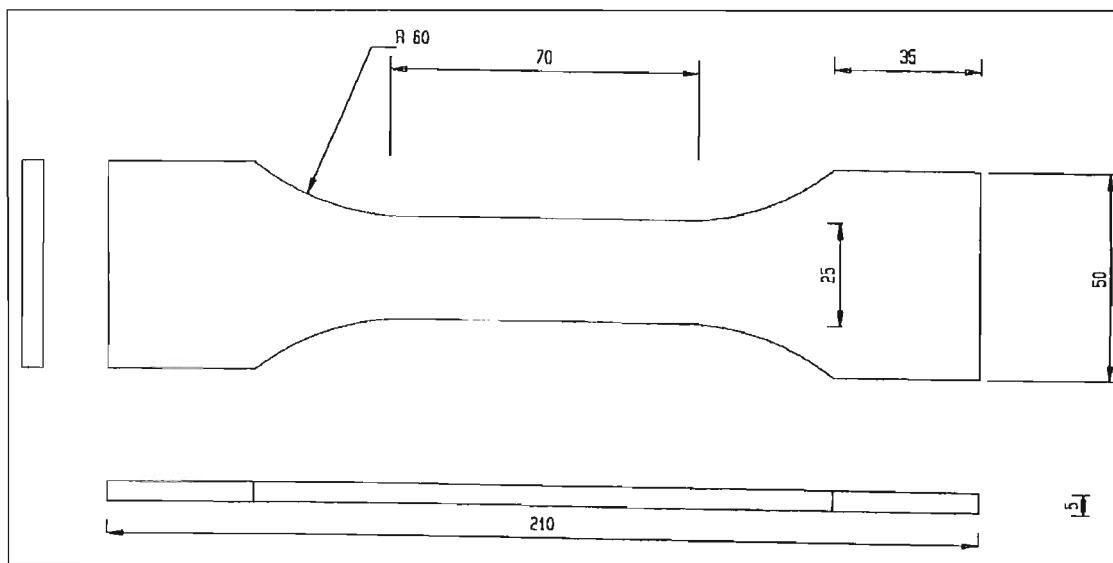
Pattern used for Atlas M130 tensile test specimen mould
